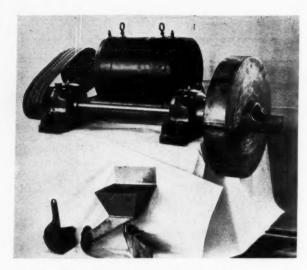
This wheel for throwing the abrasive is the heart of the machine
